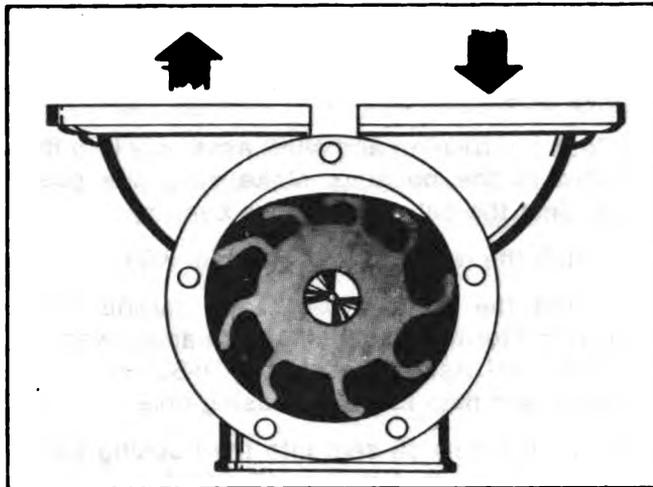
(N20810). The Impeller Installed For Right Hand Rotation.
